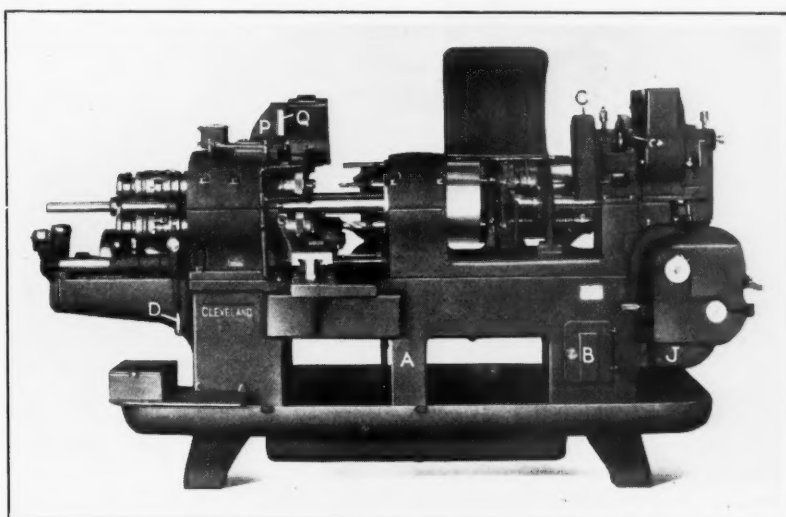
Cleveland Four-spindle Automatic Screw Machine
